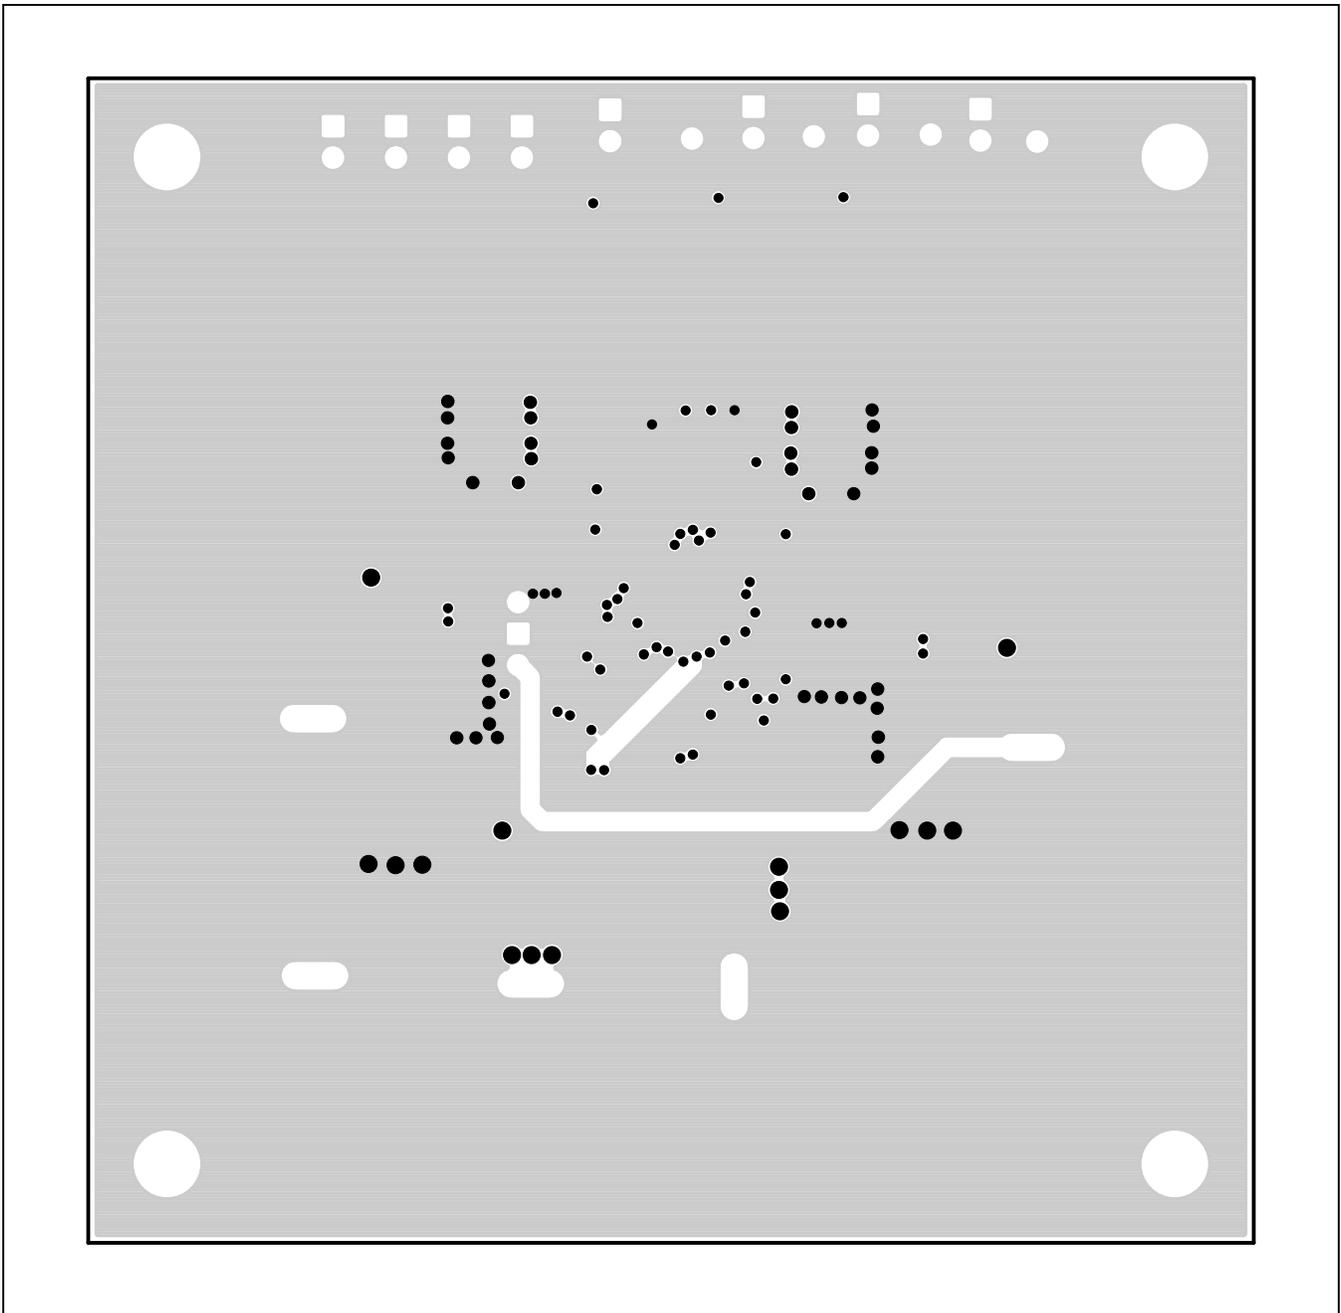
MAX16930 EV Kit PCB Layout—Layer 2 (PGND)
